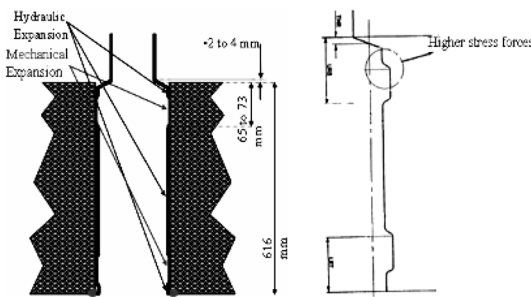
The Location of Circumferential Crack of Spain Almaraz-2 Steam Generator Tube
